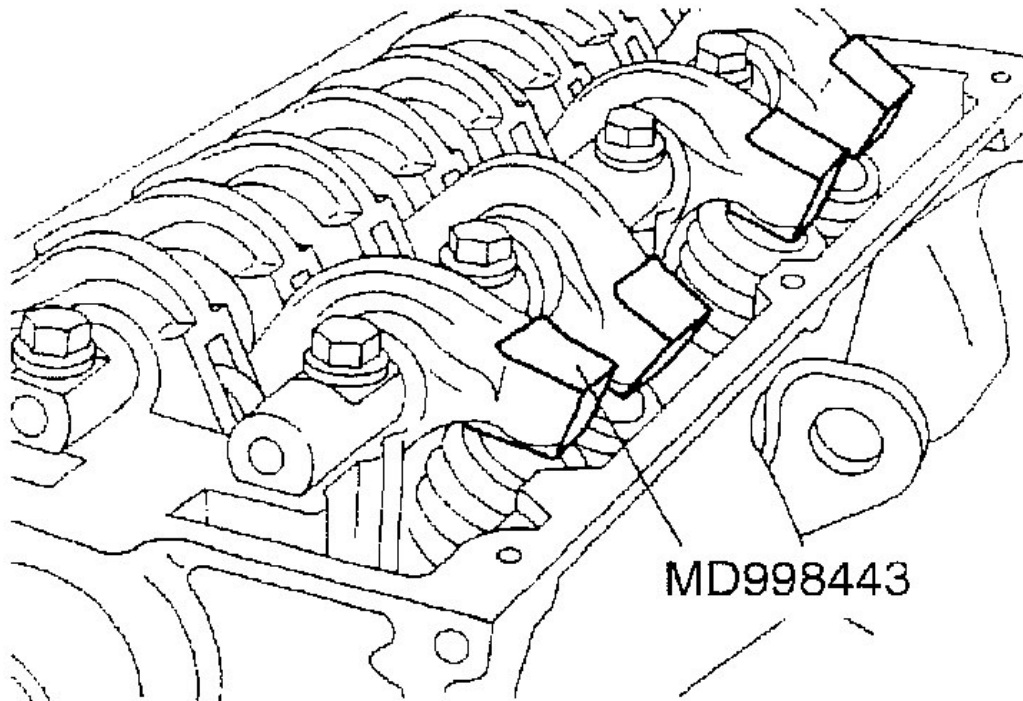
Removing & Installing Rocker Arms & Camshaft
